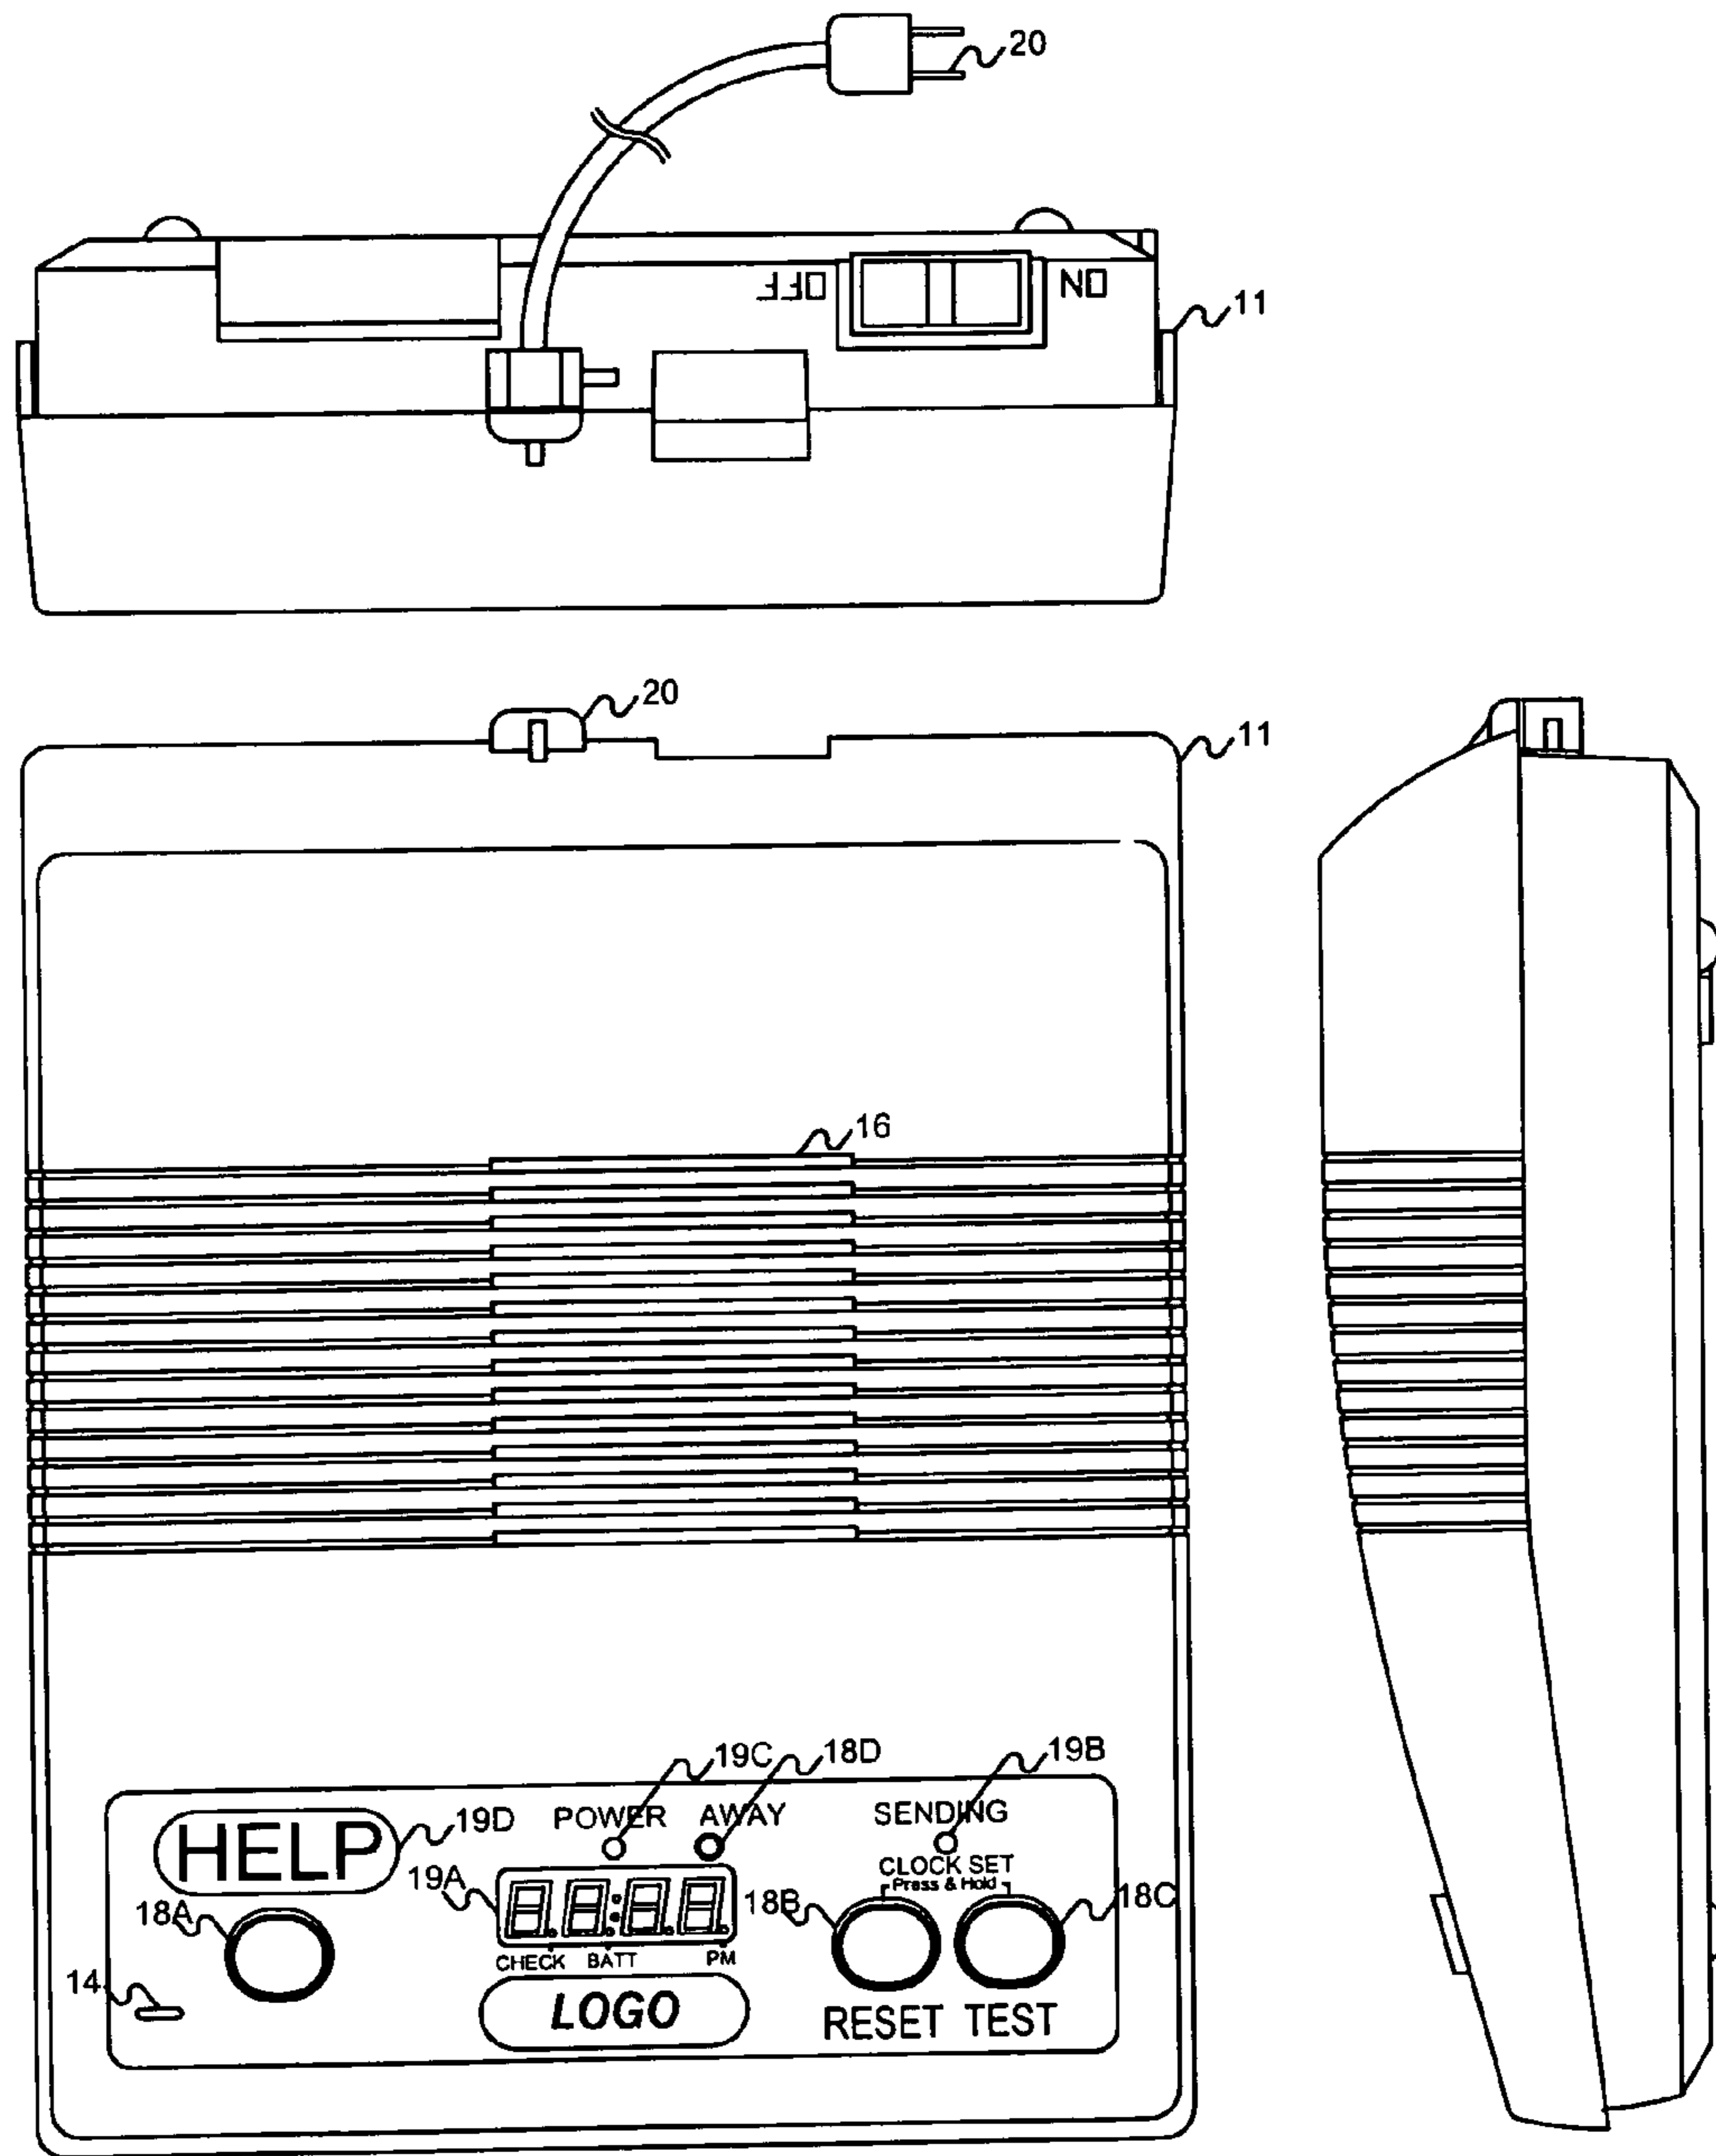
Plan View and Side View of preferred embodiment of RACU (Remote Alarm Control Unit).
